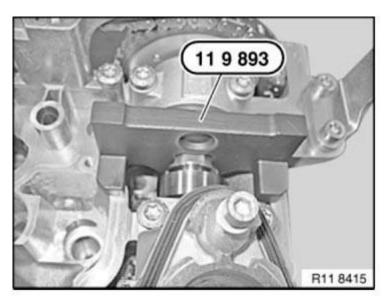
Blocking Intake Camshaft Using Special Tool 11 9 893 Courtesy of BMW OF NORTH AMERICA, INC.
